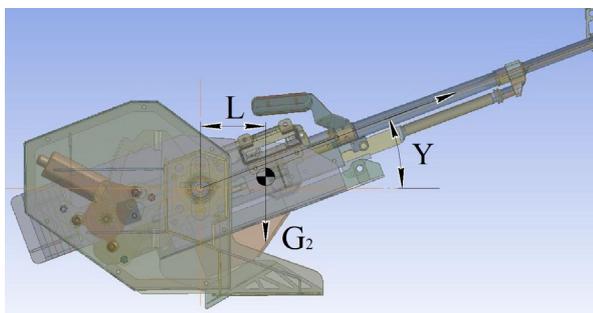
A prototype turret of a robotic system with a machine gun and counterweights
